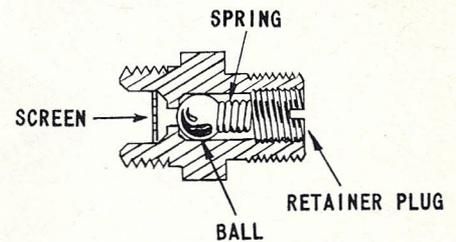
When cleaning chain oiler check valve, do not screw retainer plug in past flush with fitting.
